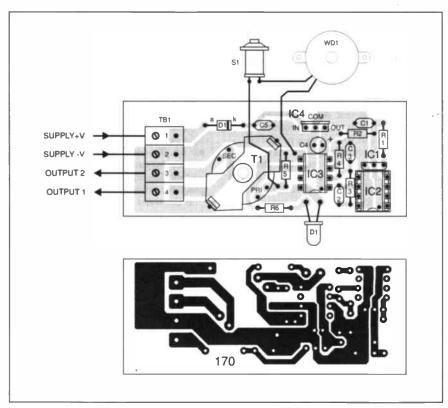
Printed circuit board component layout and full size copper foil master for the PIC Water Descaler. The piezo sounder and pushbutton switch are optional components.
